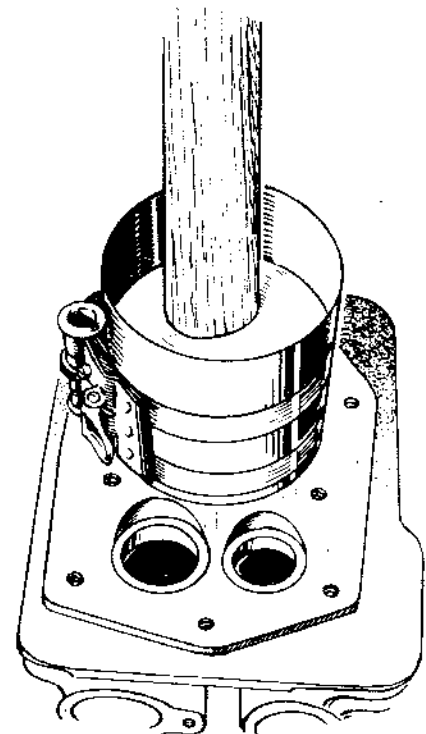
INSTALLING PISTON AND CONNECTING ROD
